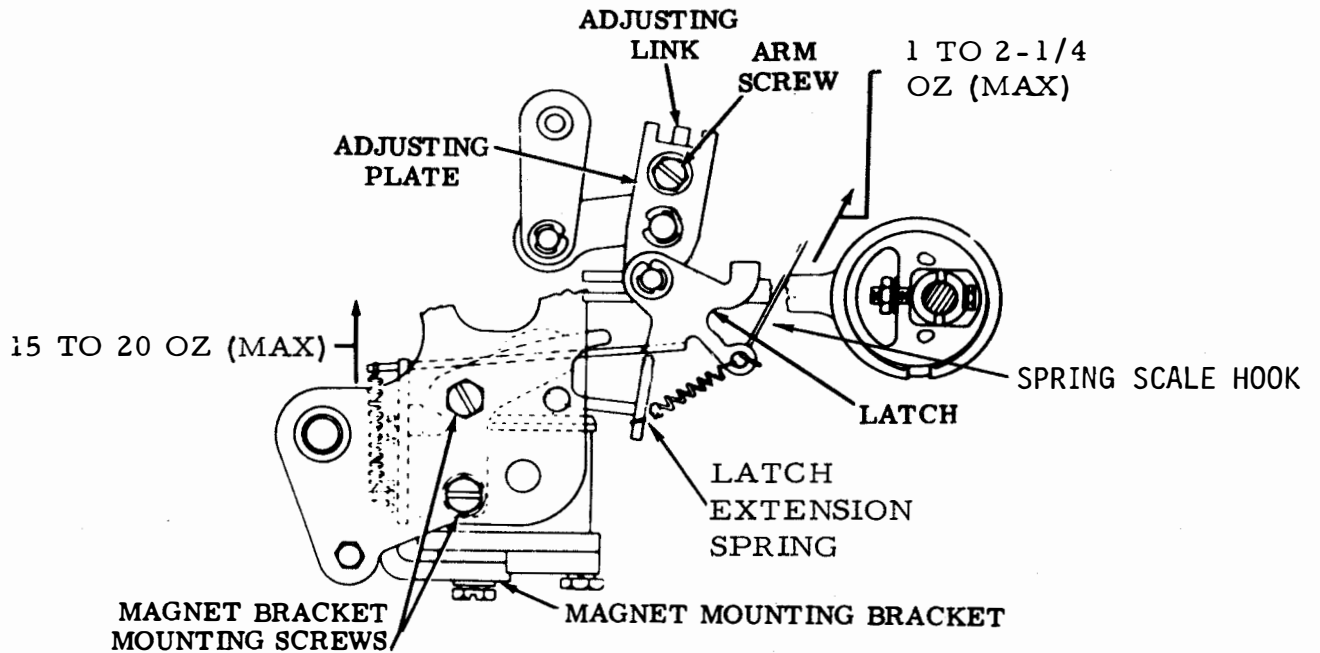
Armature Spring, Latch Extension Spring, and Magnet Position, Reperforator, Front View
